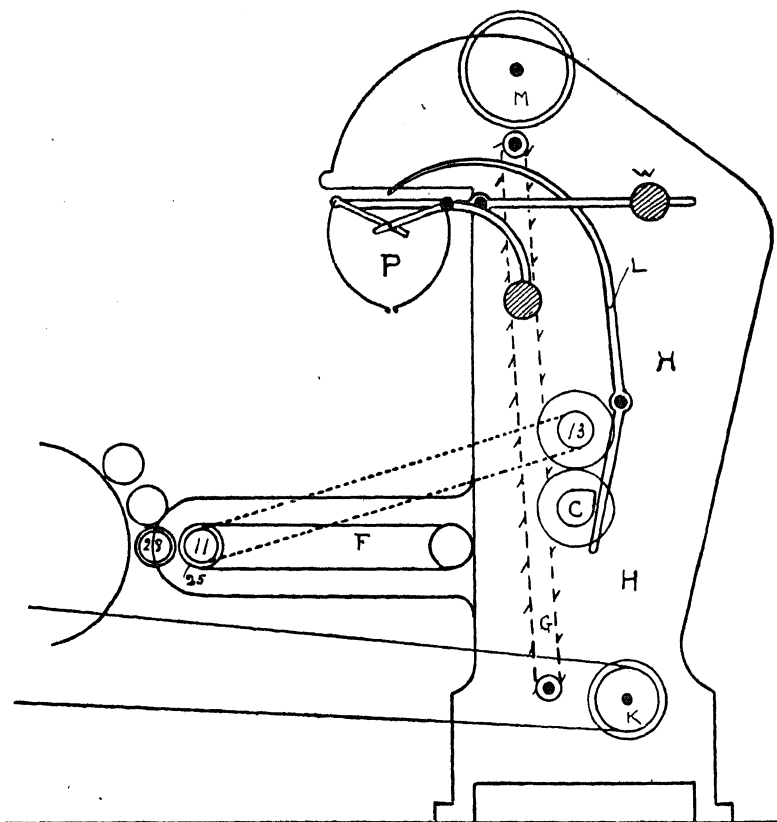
AUTOMATIC FEEDING MACHINE.
